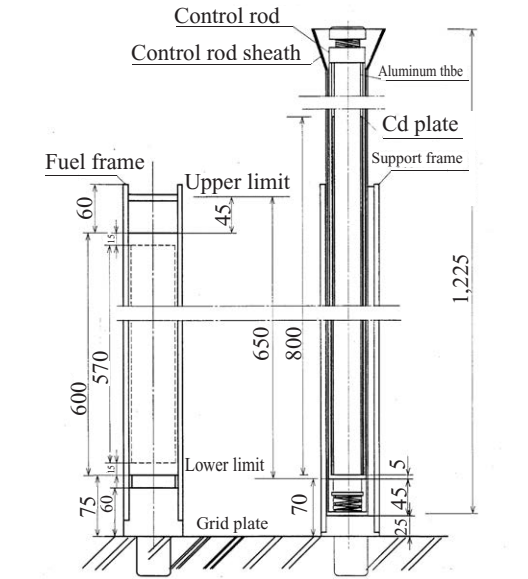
Vertical position of fuel assembly and control rod in KUCA C core (unit: mm)
